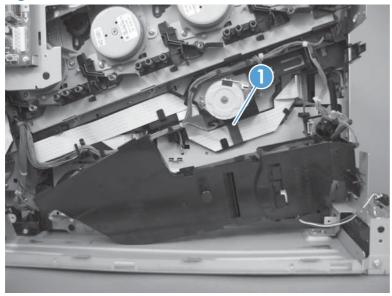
Remove the exhaust fan and fan duct (3 of 3)
